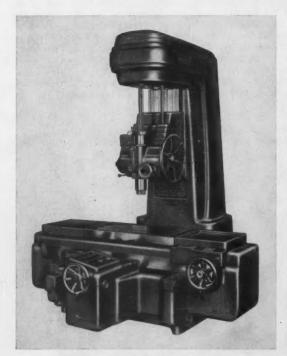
Fosdick jig borer combines direct dimension measuring with automatic positioning
